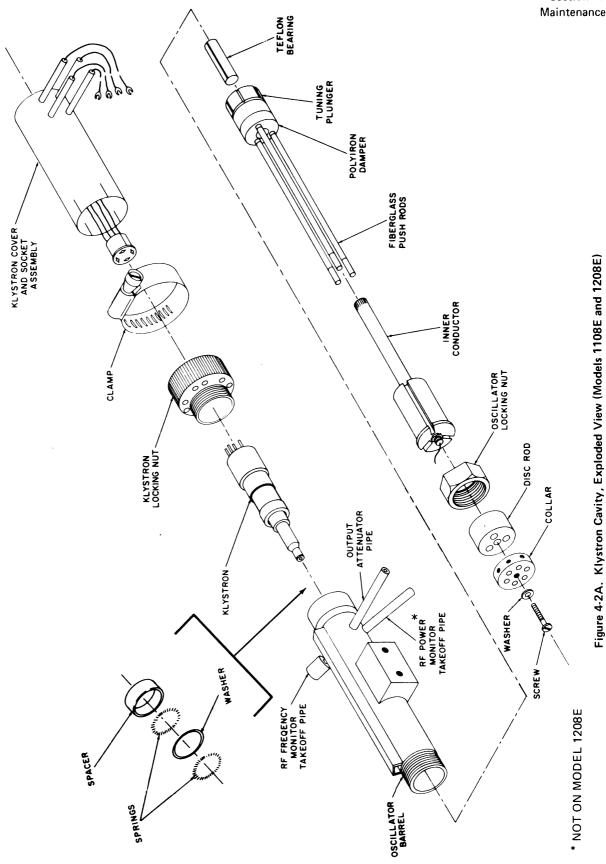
A. Klystron Cavity, Exploded View (Models 1108E and 1208E)
